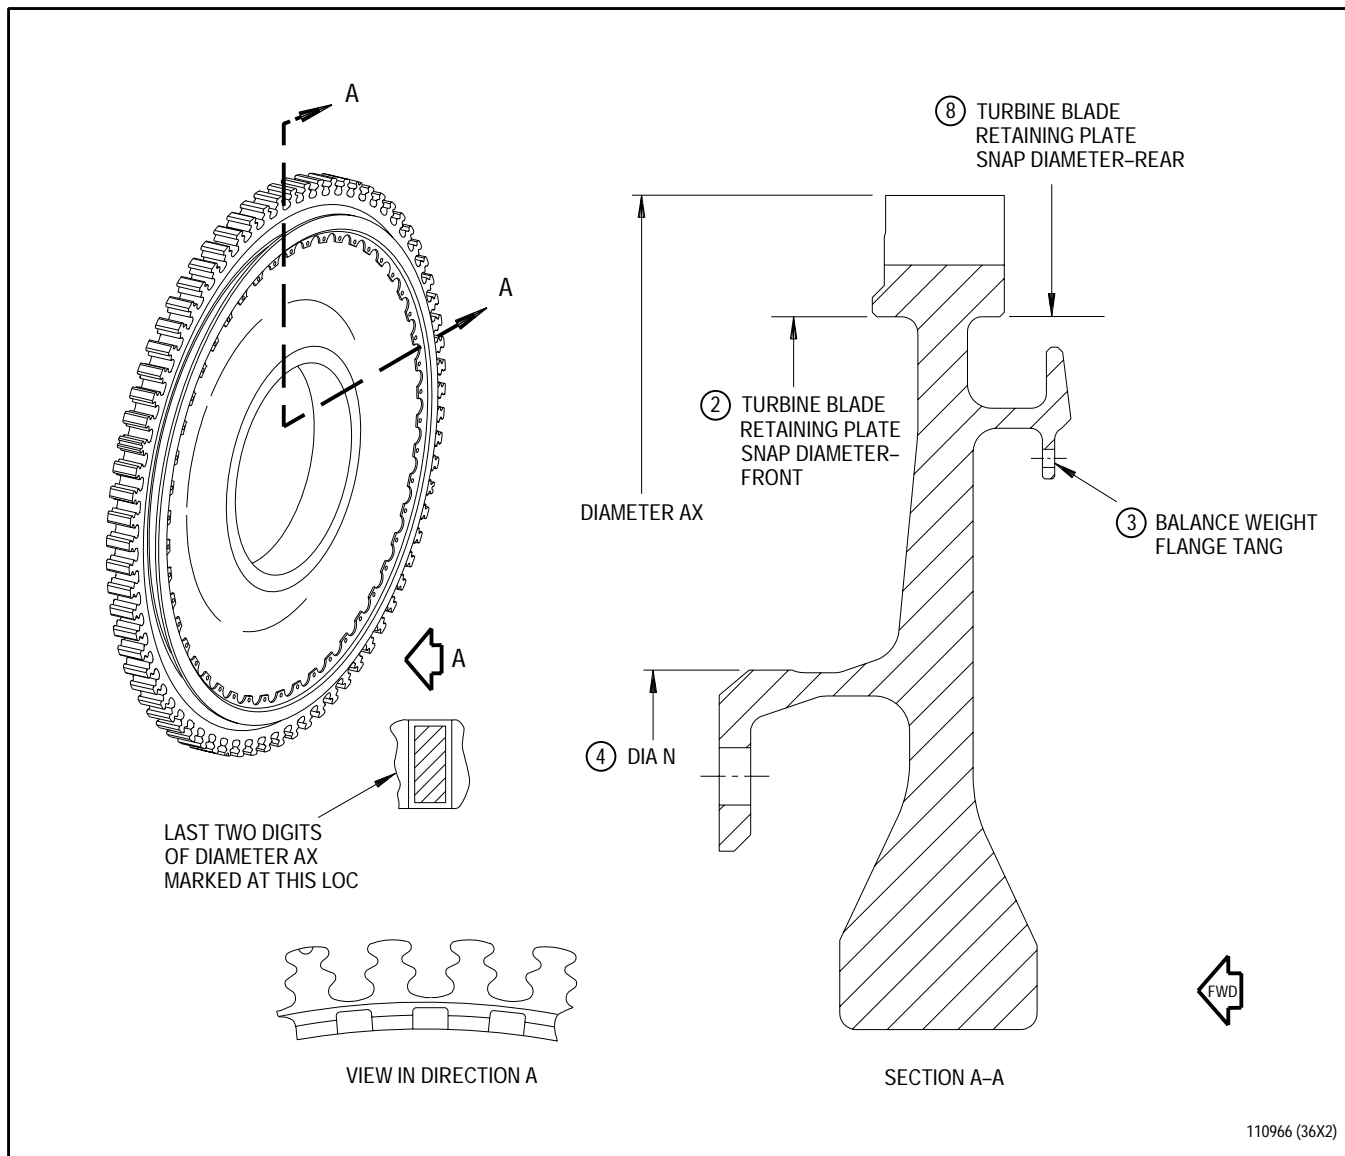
Second Stage Turbine Disk - Inspection (Sheet 1 of 3)
